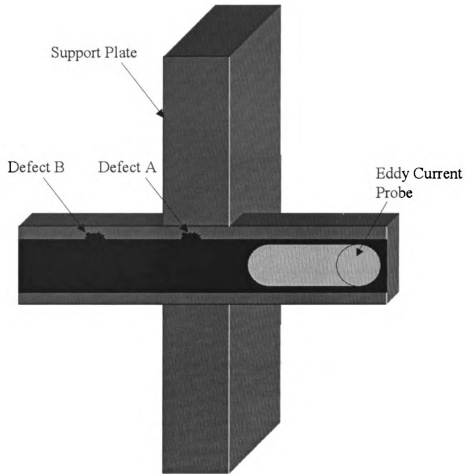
Cutaway View of steam generator tube with support plate and defects
